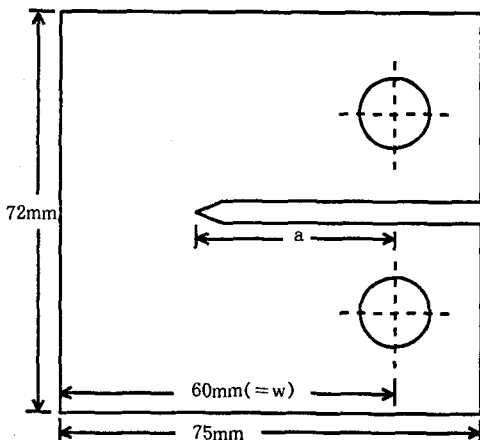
Compact tension specimen used for determining the fracture toughness( $K_{Ic}$ )
